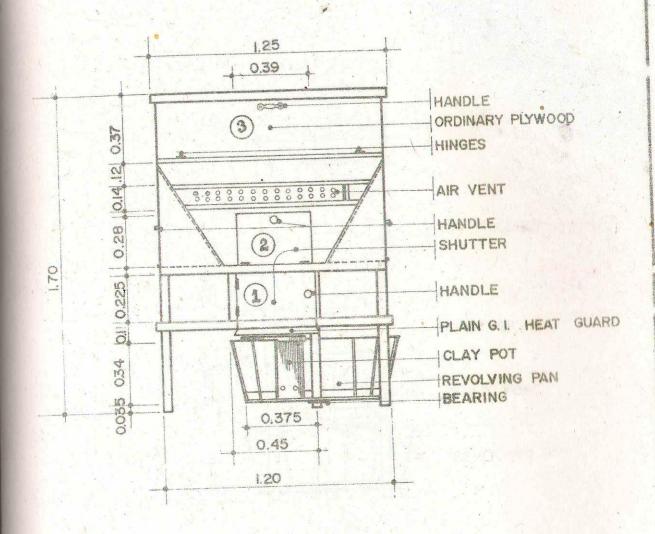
FRONT ELEVATION Scale: 1:20 meter
